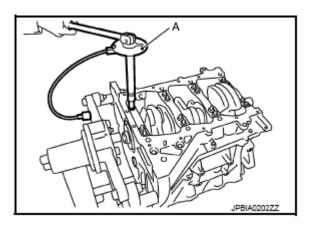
Checking Lower Cylinder Block Bolt Tightening Angle Courtesy of NISSAN NORTH AMERICA, INC.
